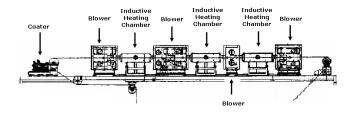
Layout of inductive heating coater oven installed on CCL plant
